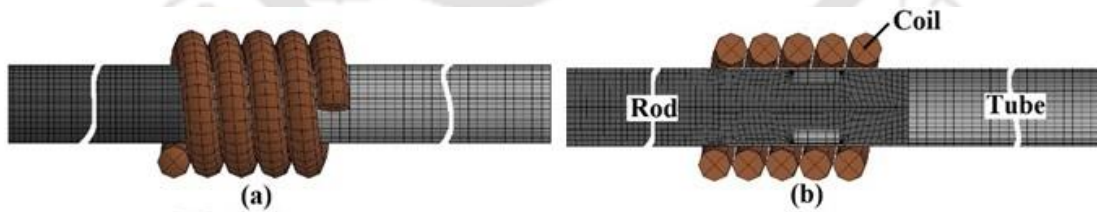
(a) side view and (b) cross-sectional view of assembled models
